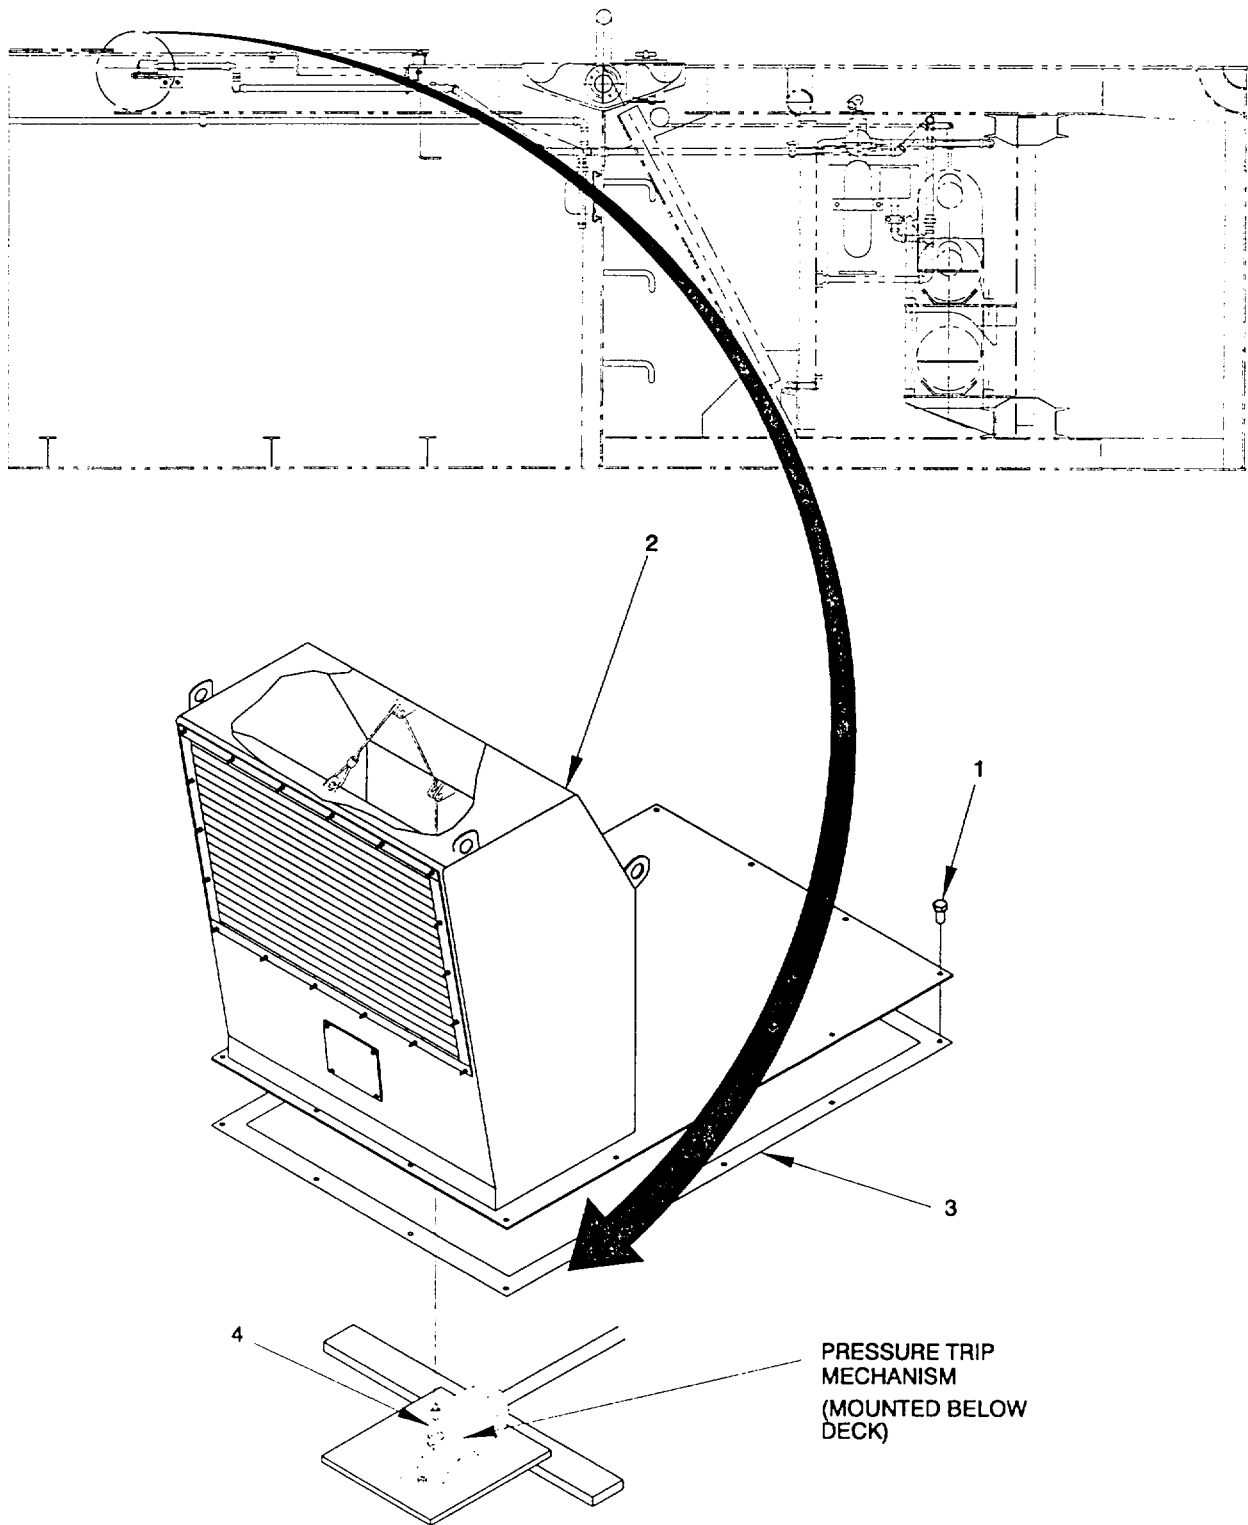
Intake Plenum Assembly, Remove/Install.
